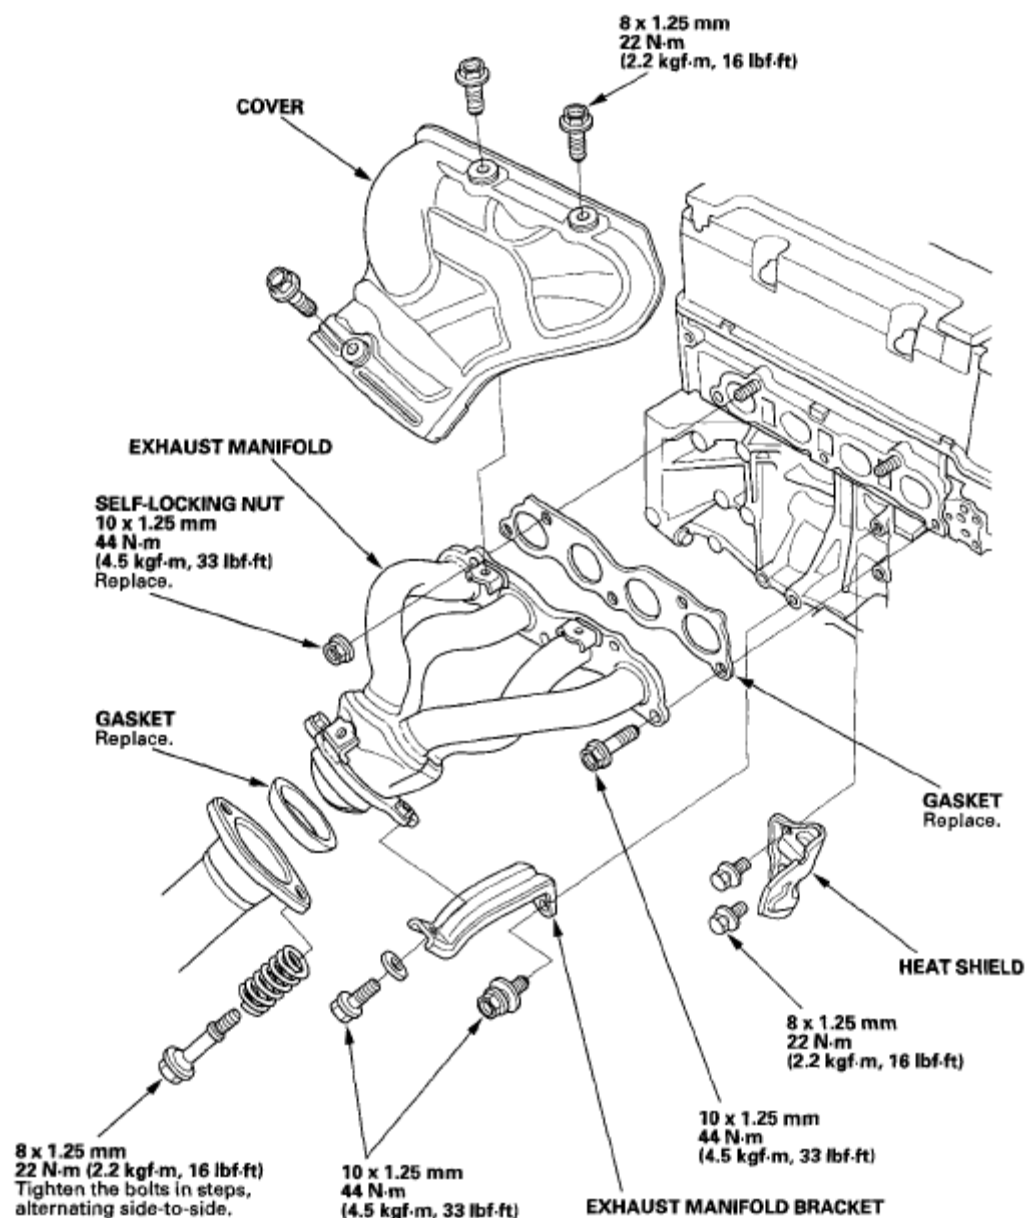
Exploded View Of Exhaust Manifold (With Torque Specifications)
